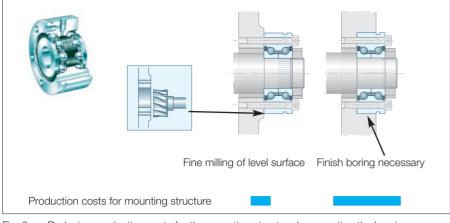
Reducing production costs for the mounting structure by mounting the bearing to a flat surface
